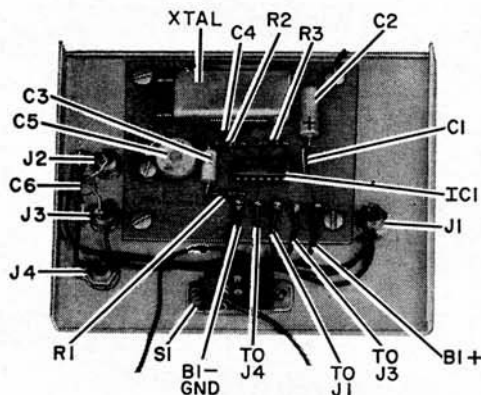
Photo shows component locations on circuit board and front panel. Notch on $IC1$ is to left.
